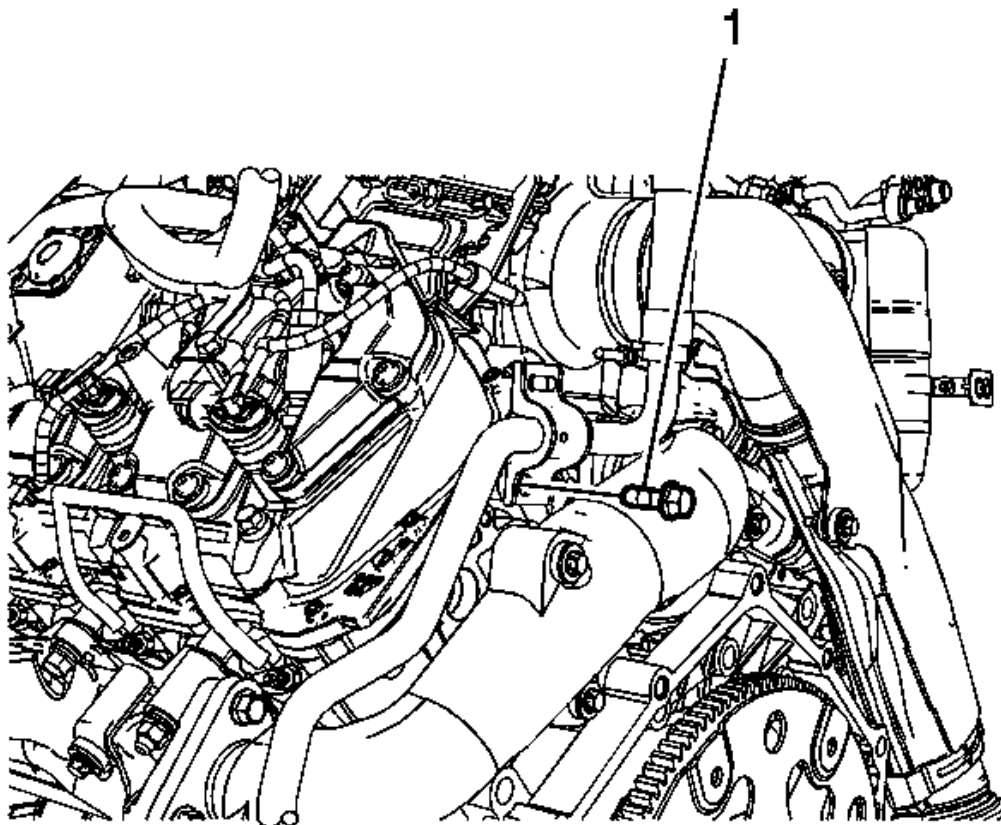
Identifying EGR Cooler Pipe Bolt & Bracket
